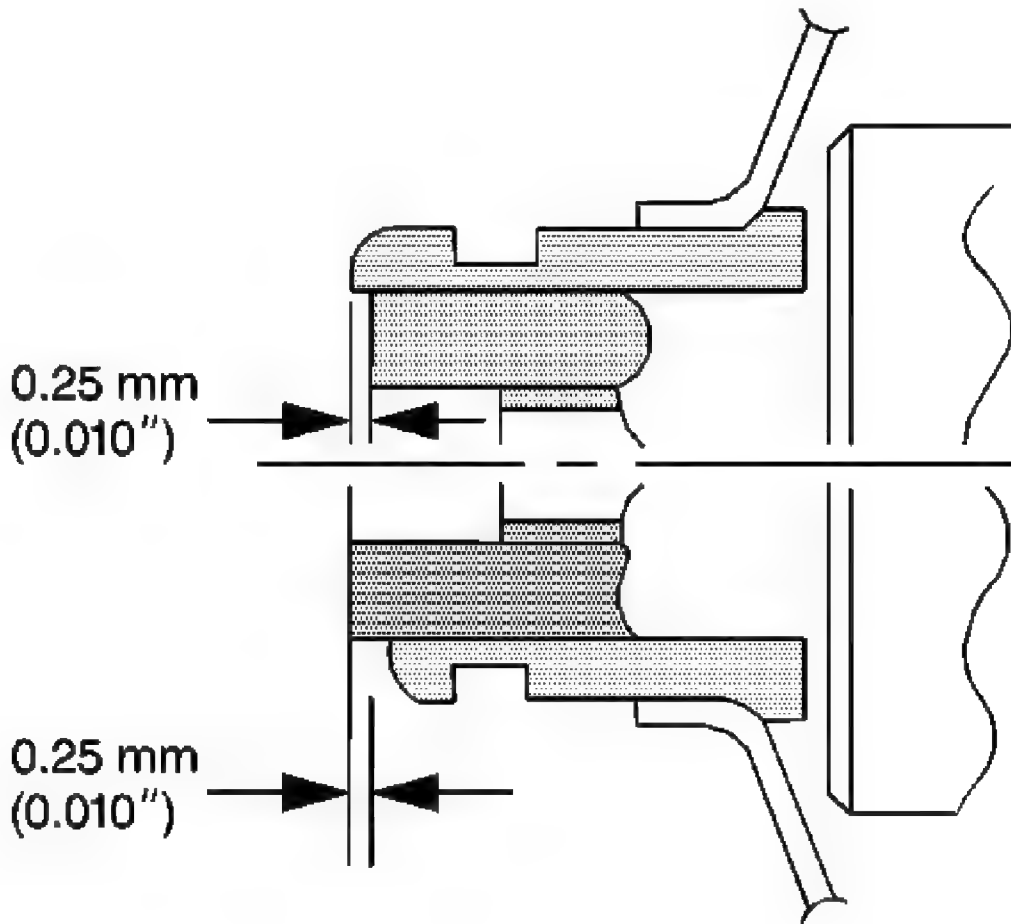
Measuring Axial Tolerance Of Power Steering Pulley On Pump
